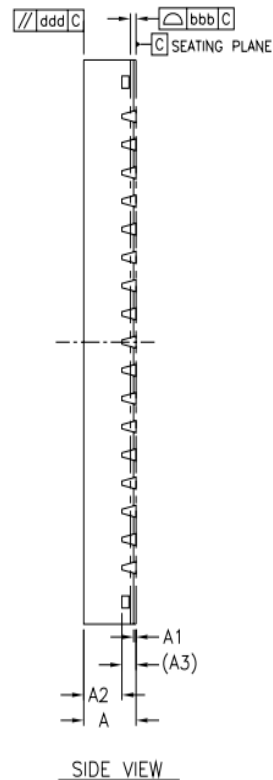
RKNanoD-N QFN68 Package Side View
